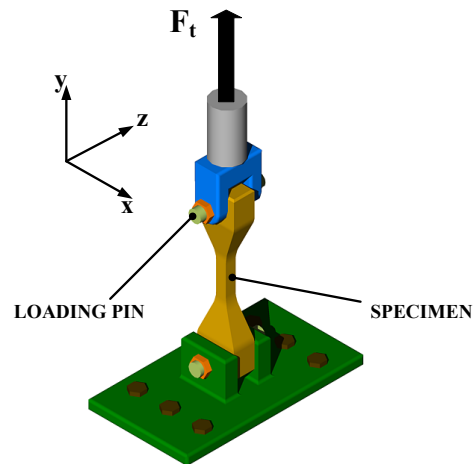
Jig for the fatigue crack growth experiment
